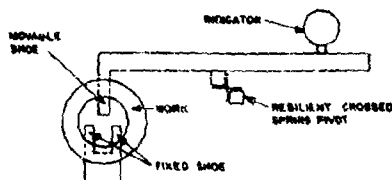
Schematic arrangement of shoe-type gage for internal threads.
